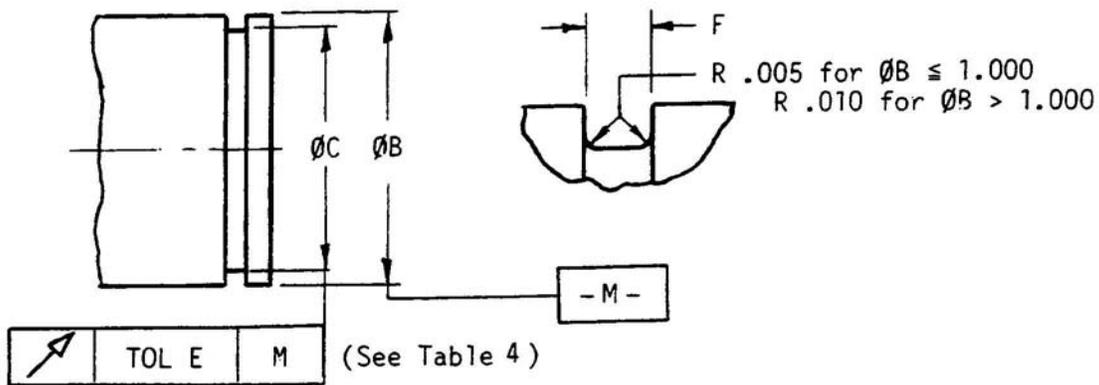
Groove Dimensions, Type I, Classes 1 and 2 Retaining Rings
